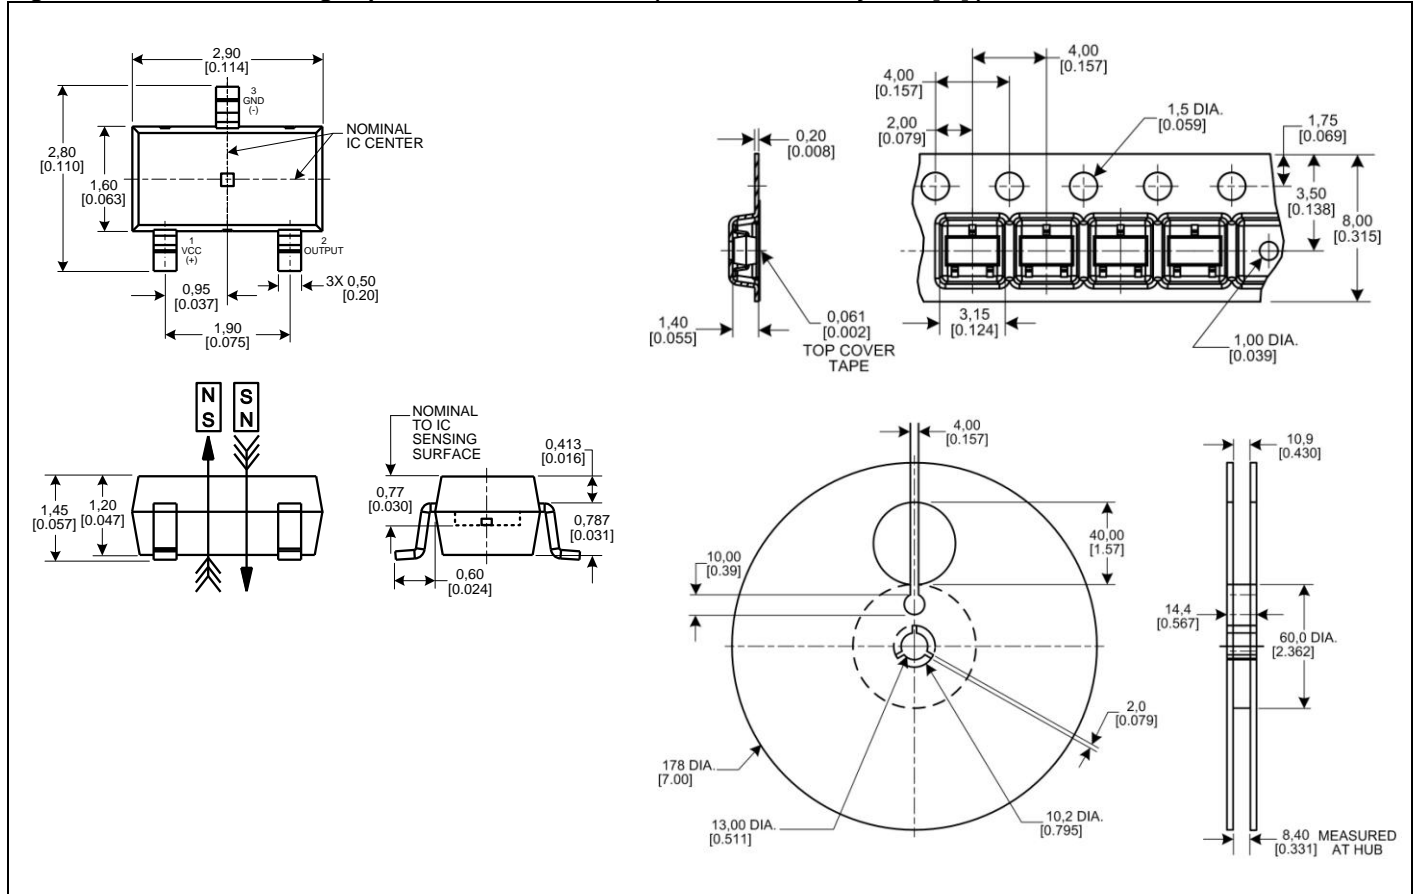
SS451A Mounting Dimensions (For reference only. mm/[in].)
